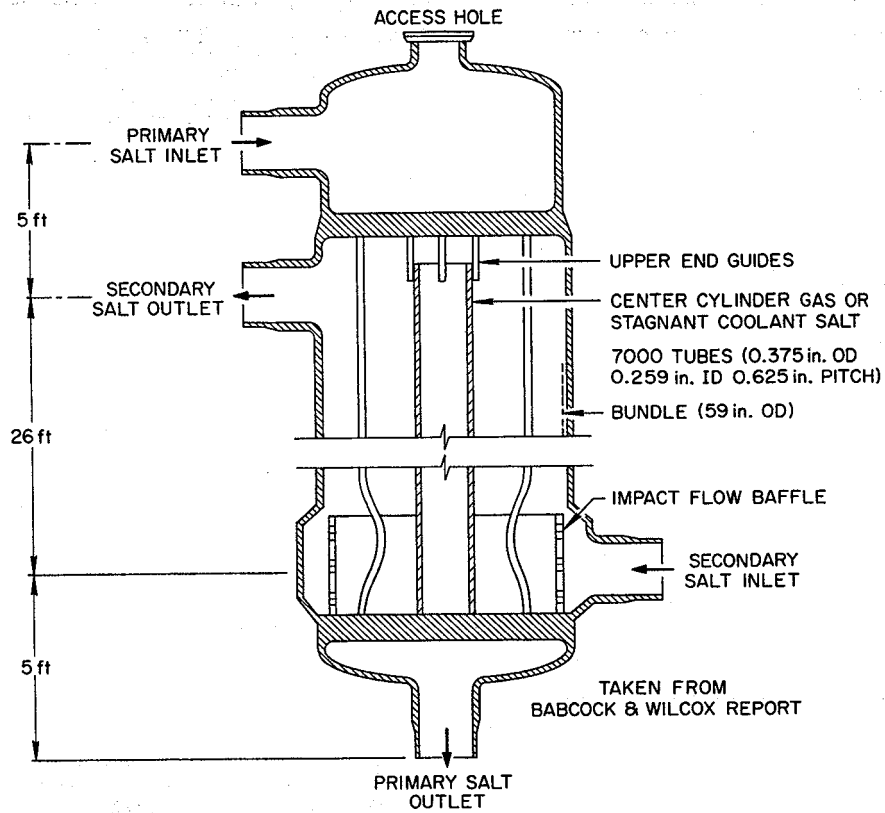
Fixed sine-wave tube IHX with tubesheet access.
